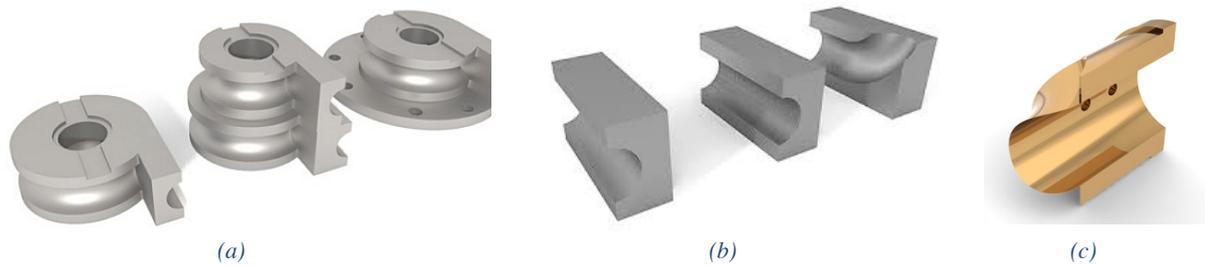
Examples of shapes and material for a) bending dies; b) clamping dies; c) wiper die.
